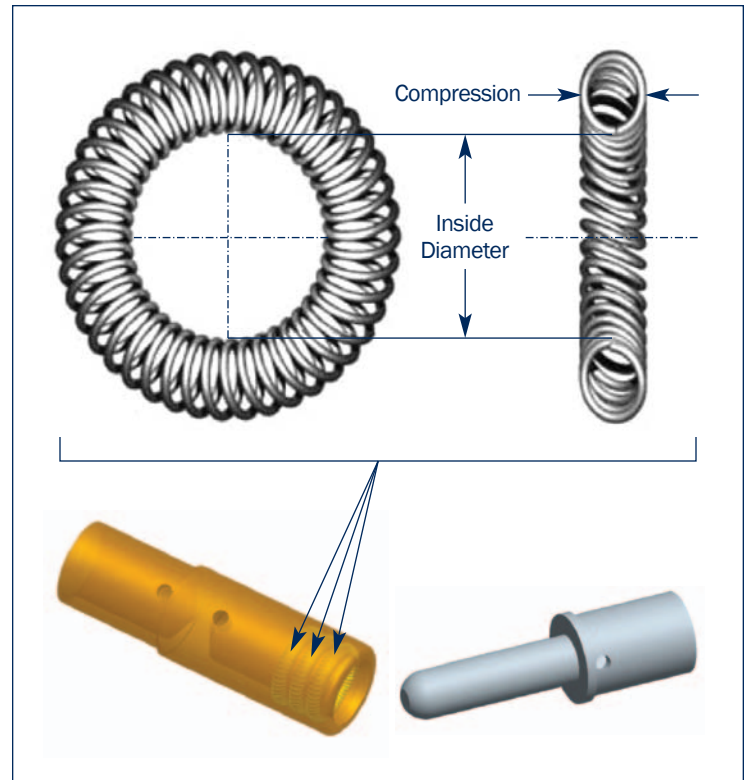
Bal Seal technology in which several toroidal shaped springs are inserted into individual sockets for the standard pin contacts. Each coil of each spring gives a contact point to the pin and socket mated pair. The mated pair then exhibits much lower contact resistance and therefore much lower heating for a given current flow than the conventional (two or three contact point) mated pair.
